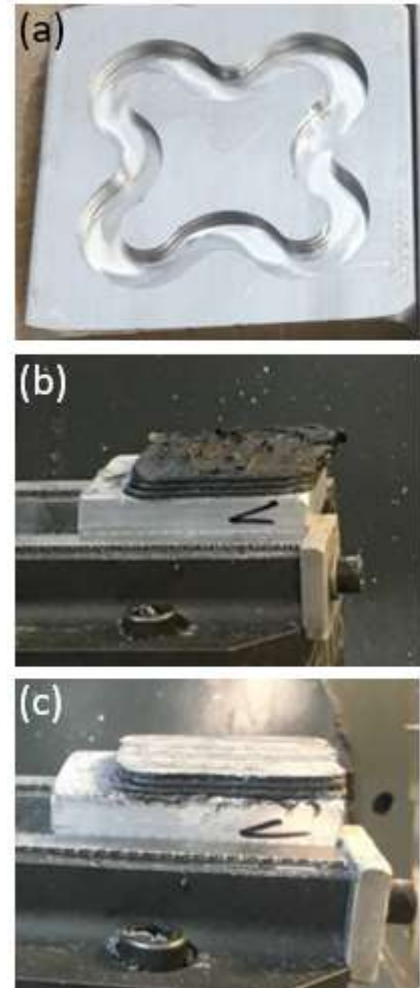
Tensile sample is produced by a) machining the dovetail profile in aluminum b) extruding ABS/CF c) machining the printed material.
